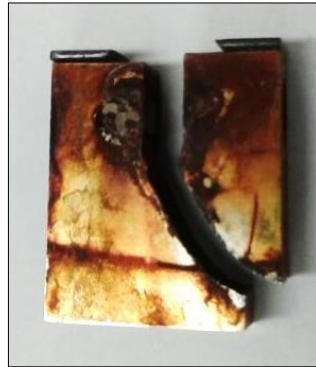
Batch 2 S450 WOL specimen after fracture.
